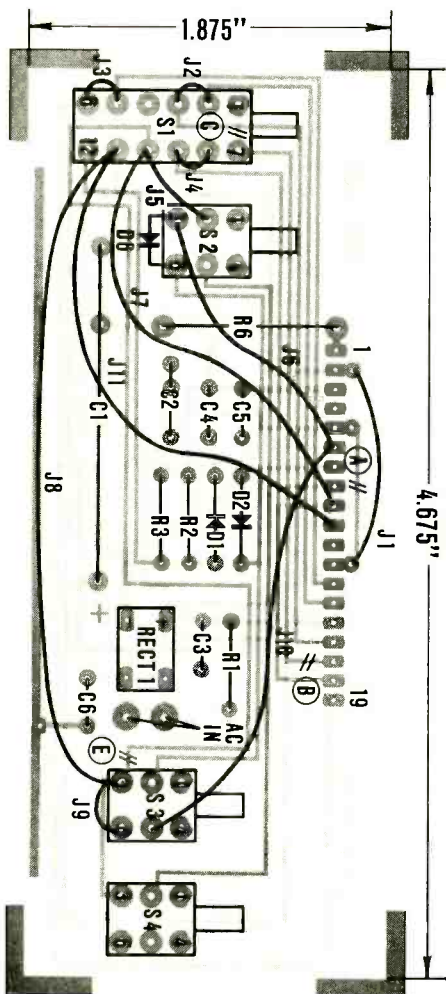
COMPONENT PLACEMENT for the back board. Check locations of jumpers and foil breaks used in the various *Digi-Toll* options.
